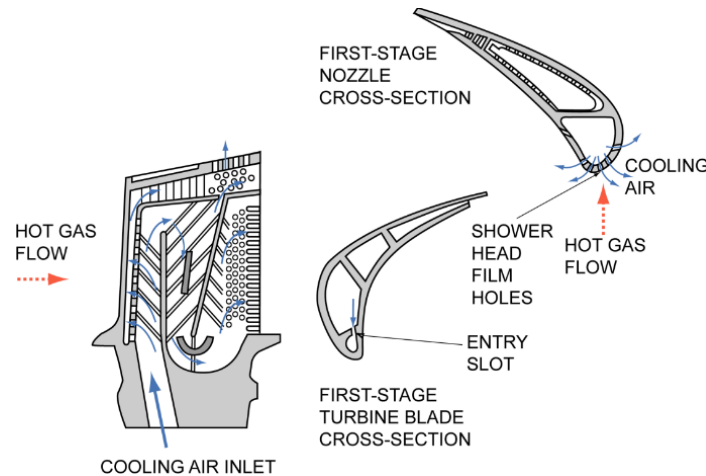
Practical Examples of Blade Cooling Concepts: Convection/Impingement Cooling (left), and film cooling (right)
